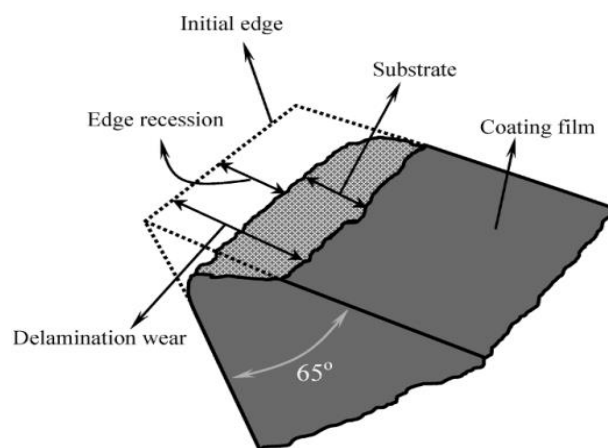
Schematic wear delamination measurement on the clearance face of the cutting tool.
